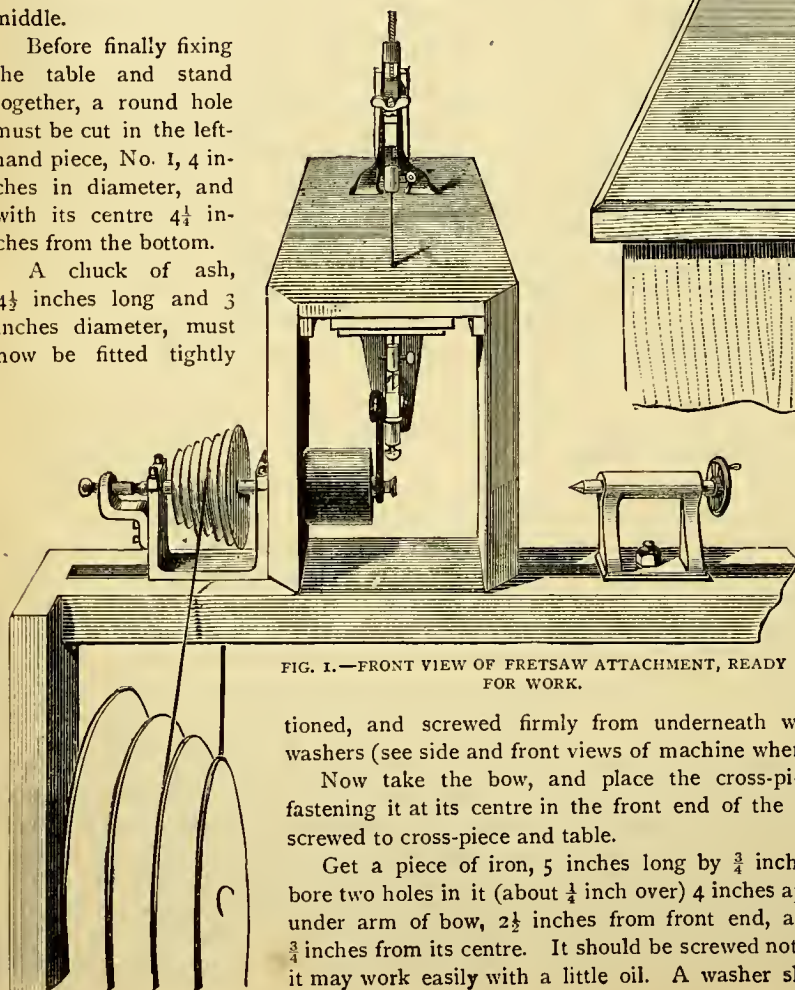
FRONT VIEW OF FRETSAW ATTACHMENT, READY FOR WORK.
